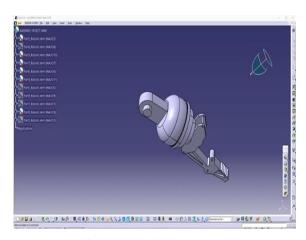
The shaft and Key of Oldham Coupling in CATIA
